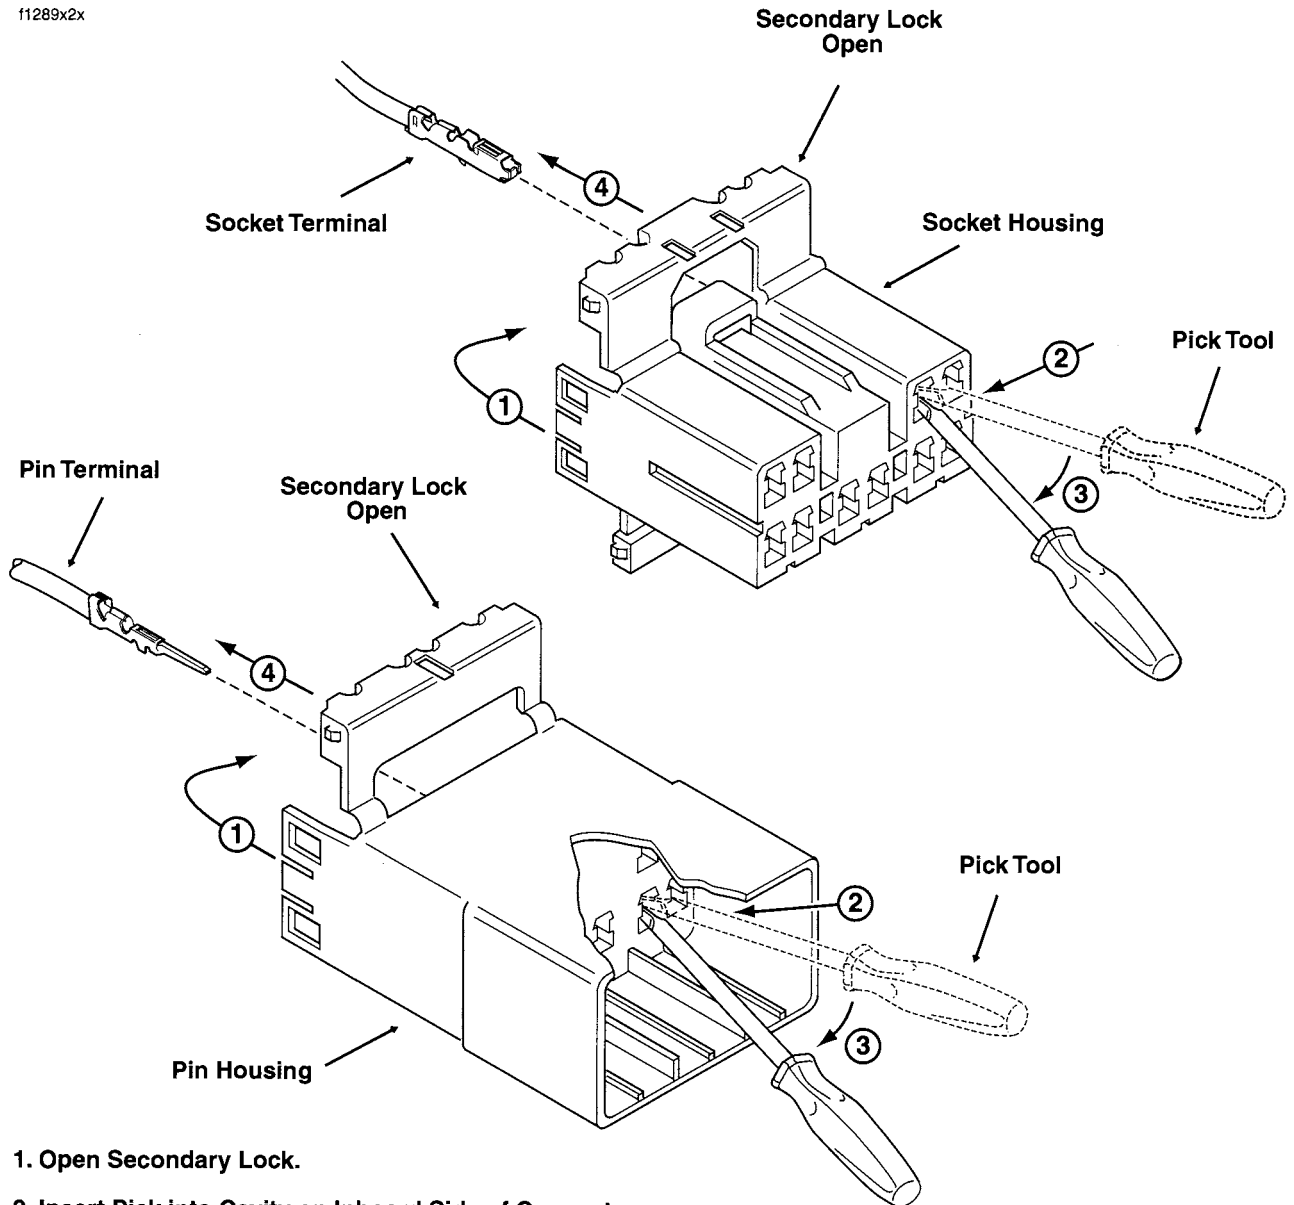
10-Place Amp Multilock Connector (Exploded View)
